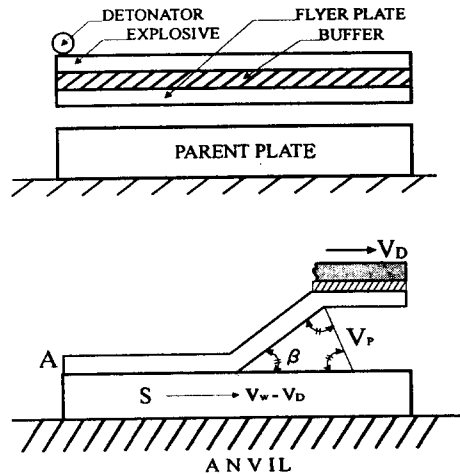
Parallel Arrangement for Explosive Welding
